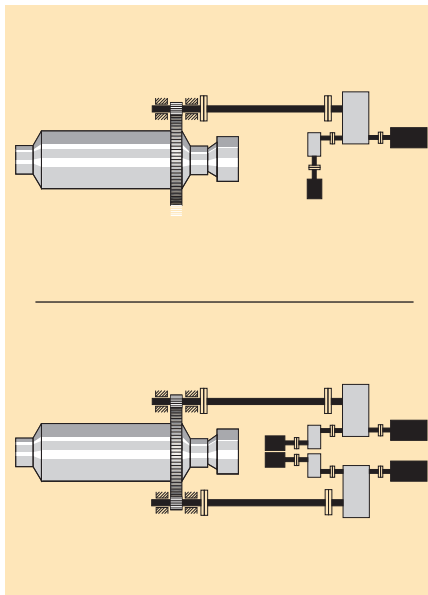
Possible arrangement of drive elements in single and double-pinion drives
